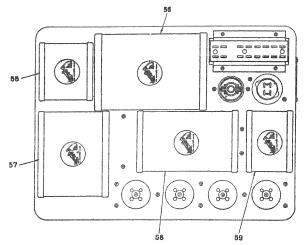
Top View of Power Amplifier Unit, Showing Parts
